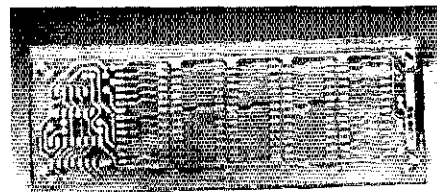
This photo shows what you can expect from using this process for making PC boards. Even the fine traces between the pads have been faithfully reproduced.
